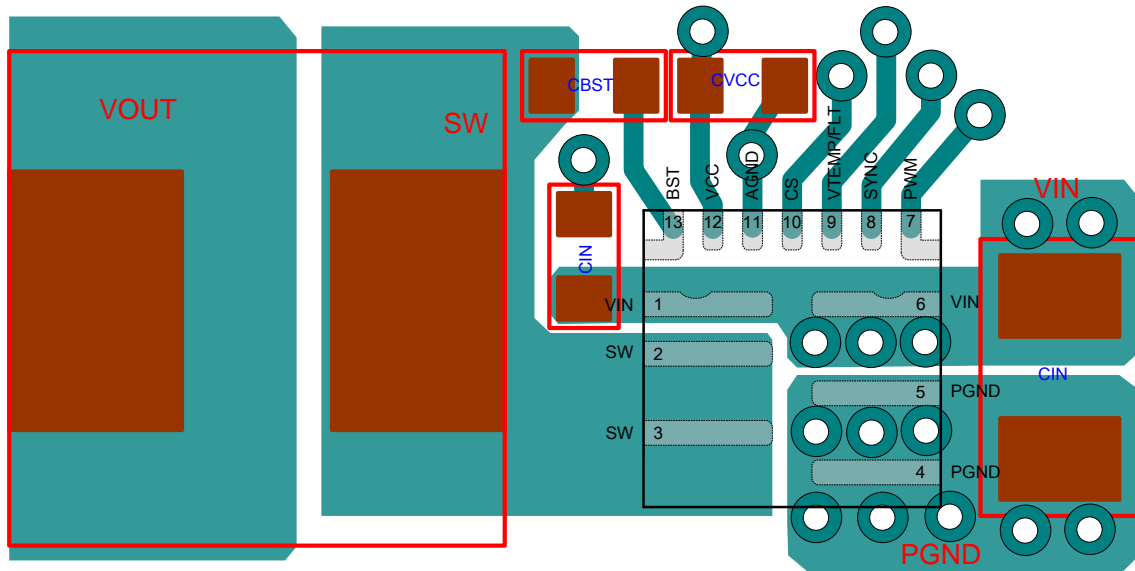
Example of PCB Layout (Placement & Top Layer PCB)
